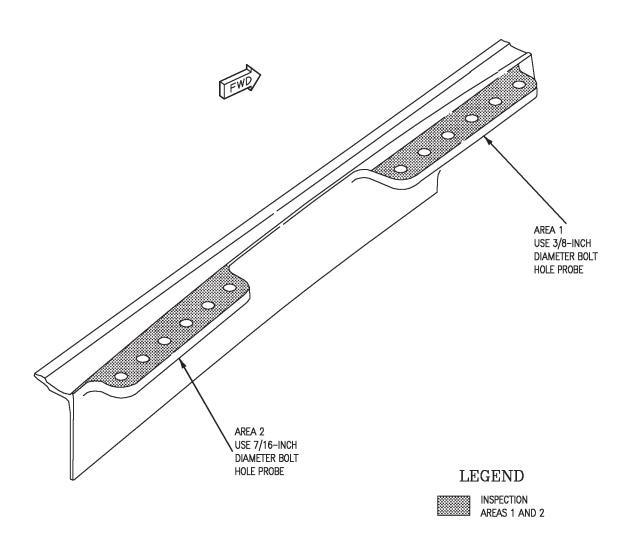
Drag Load Member Attach Holes (Sheet 1)
